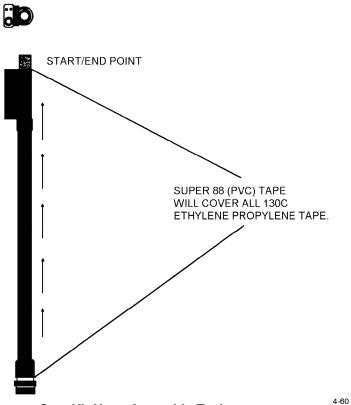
Unmodified Regulator to Seat Kit Hose Assembly Taping
